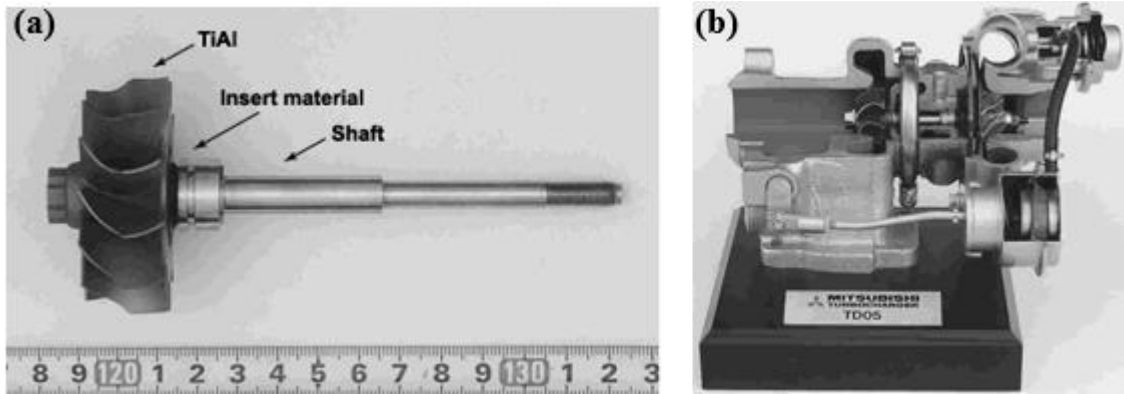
(a) TiAl turbocharger wheel joined to the shaft and (b) TD05 turbocharger used in Lancer Evolution VI [53].
